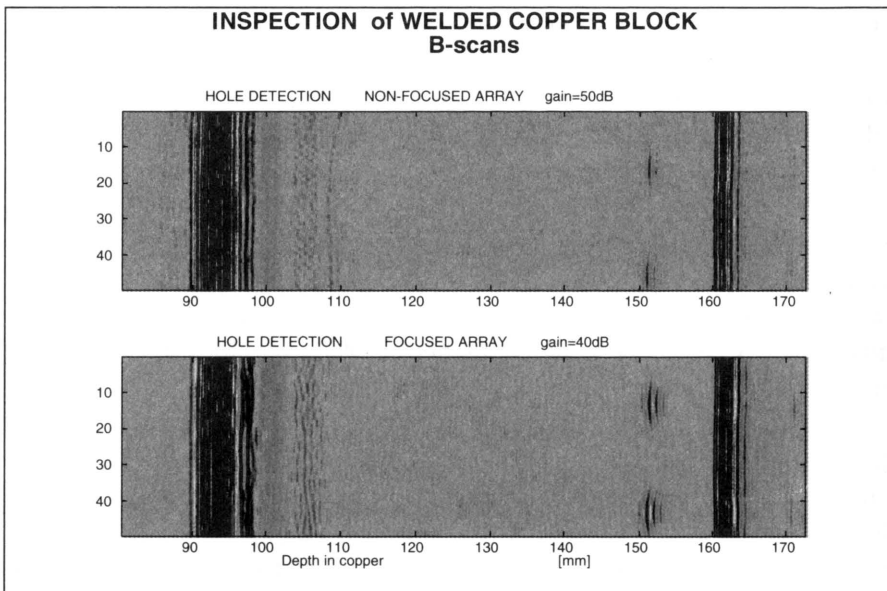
B-scans showing echoes from the side drilled holes in EB weld in the specimen from Fig. 6. The upper image was obtained for unfocused 16 element aperture while the lower for the focused one.
